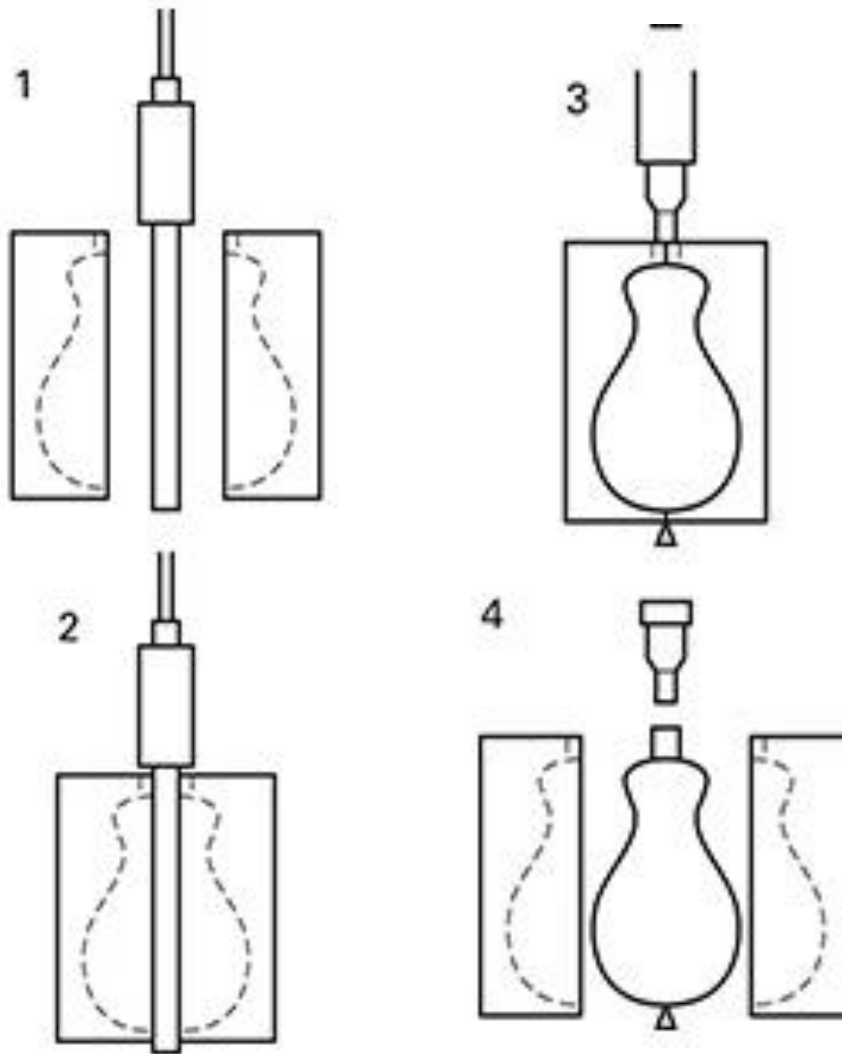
Steps in blow molding plastic parts: (1) a tube of heated plastic is placed in the open mold; (2) the mold closes over the tube, simultaneously sealing the bottom; (3) air expands the tube against the sides of the mold; and (4) after sufficient cooling, the mold opens to release the product.
